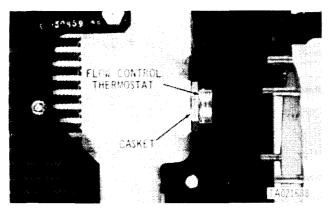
Removing or installing transmission oil cooler flow control thermostat.
